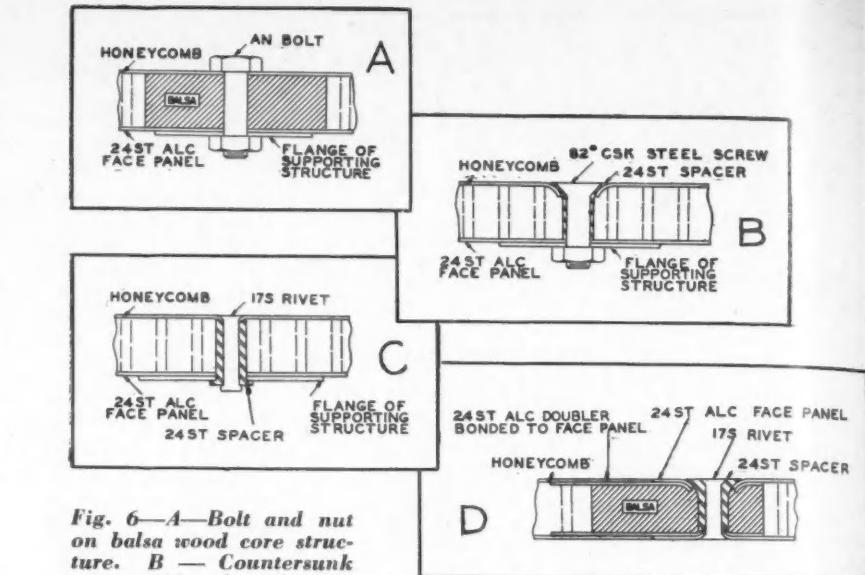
A*—Bolt and nut on balsa wood core structure. *B*—Countersunk screw with a aluminum spacer on honeycomb core structure. *C*—Rivet and spacer combination on honeycomb core structure. *D*—Typical butt splice with doubler bonded to face panel.
